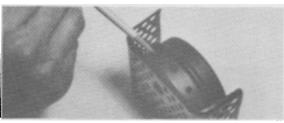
Exhaust exit holes in muffler should be free from carbon build-up. Suggest to use small wire to clean this area when necessary.
